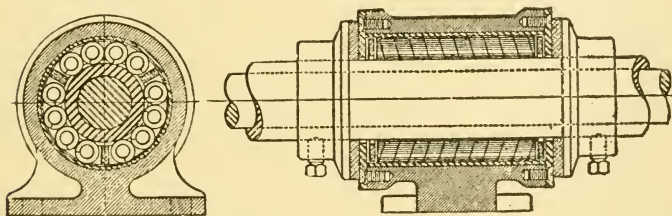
The "Hyatt" flexible roller bearing; this consists of strips of steel rolled into coiled springs, forming a strong, though elastic support, and capable of taking some end thrust.
